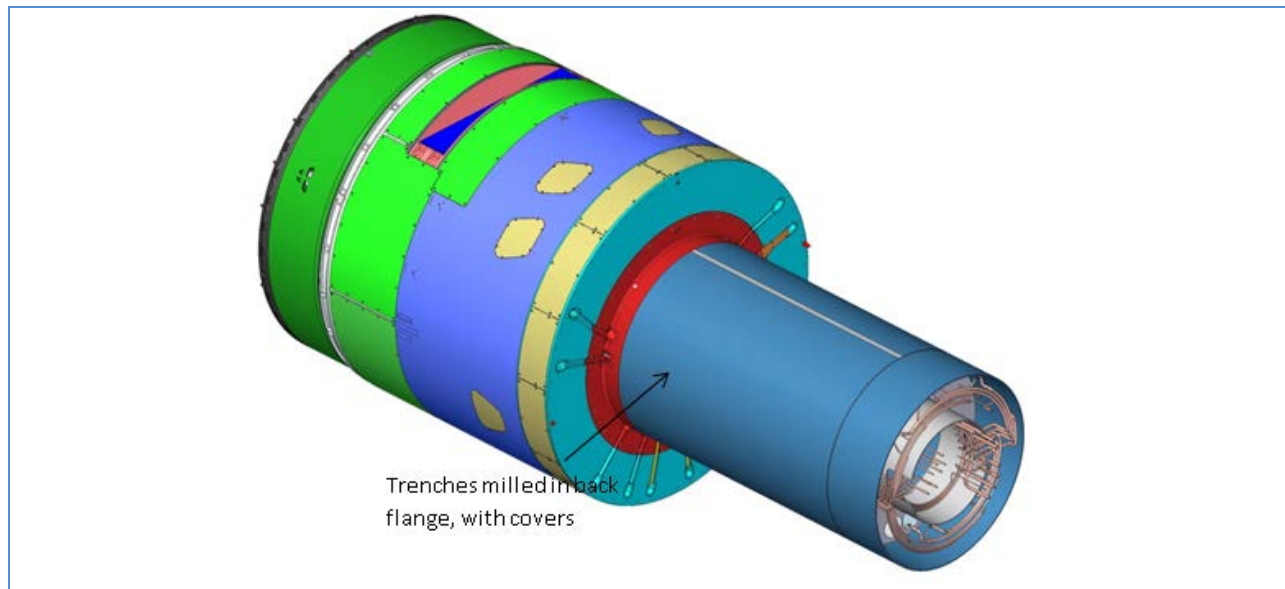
Back-end view of Camera and back flange, showing trenches cut for cabling and purge lines
